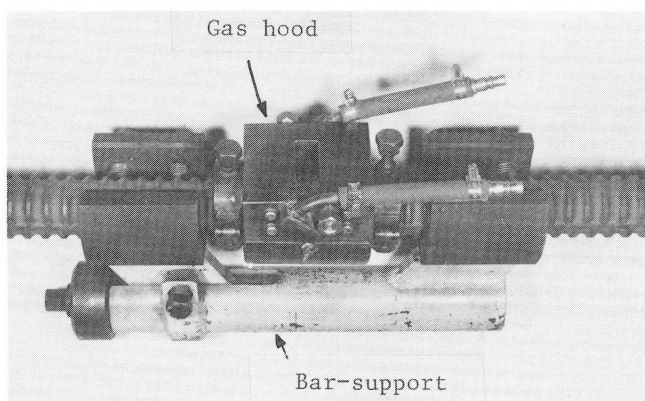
Example of semi-automatic enclosed arc welding jig
